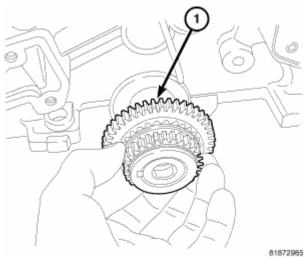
Crankshaft Sprocket Courtesy of CHRYSLER LLC
